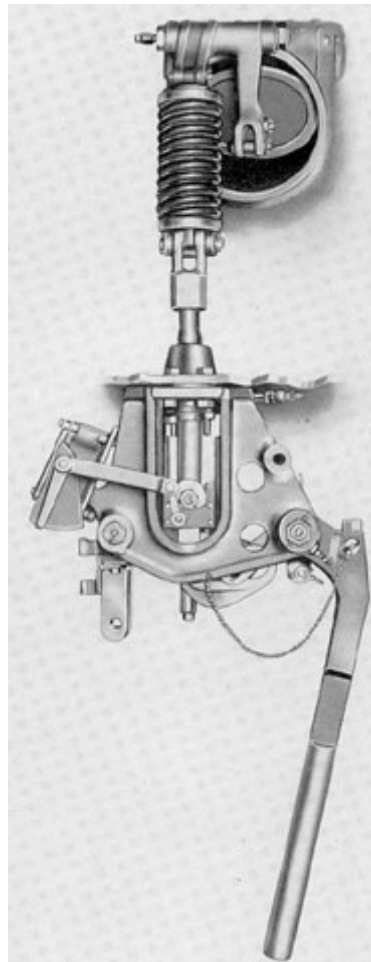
Vent valve operating gear and hydraulic unit cylinder.
